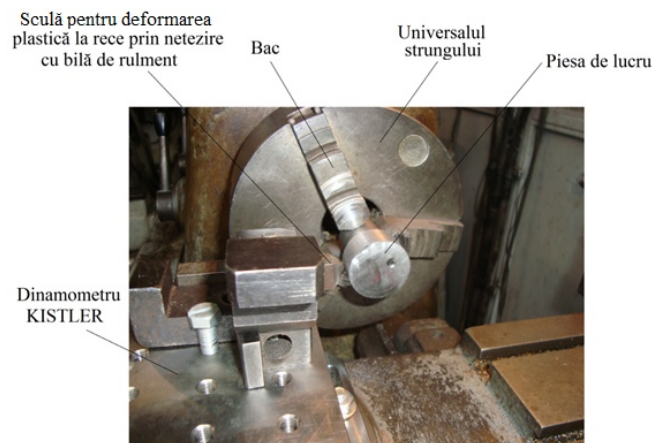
Making cold plastic deformation process by smoothing ball on a universal lathe KART E-2H.
